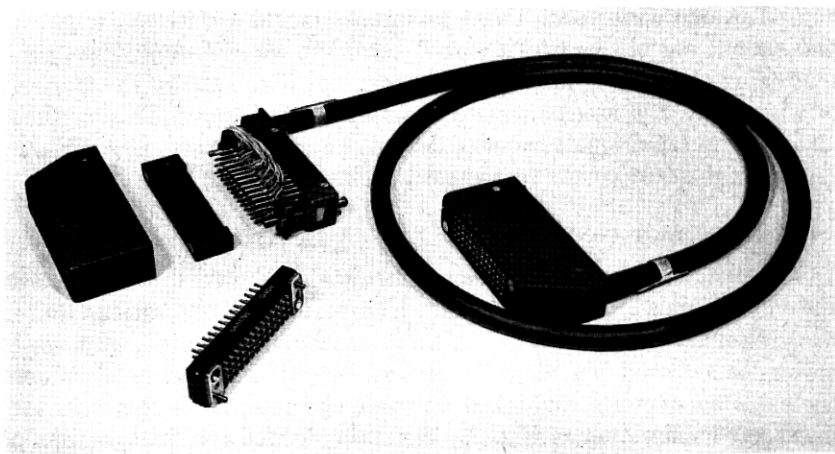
Patching cable assembly showing the method of terminating the cable on the 52-pin connectors. The connector in the lower left-hand corner is the mating connector which mounts in each unit and to which the patching cable connects.
